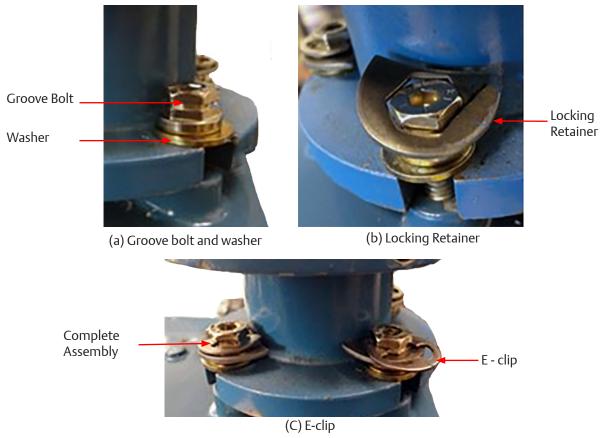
Actuator Installation Using Anti-Rotation Bolts
